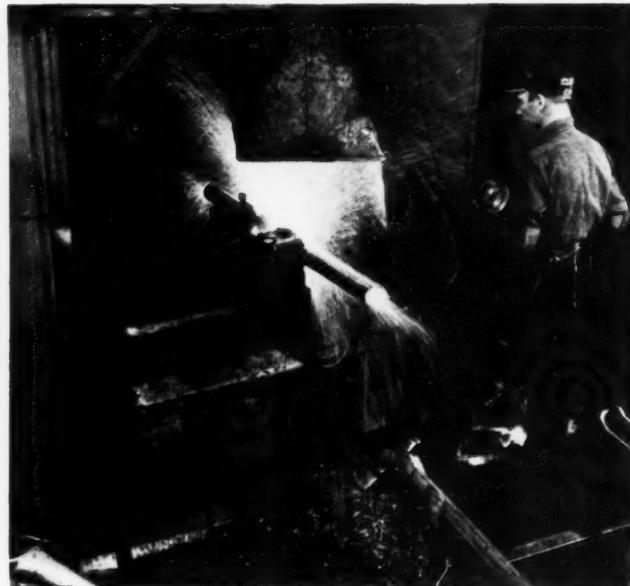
Flash Welder in the Act of Tacking together the Two Halves of the Housing
